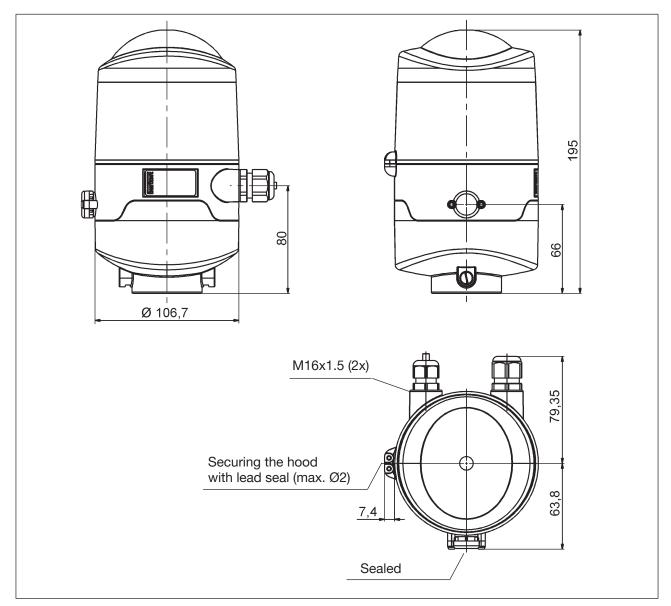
Dimensional drawing (for models without solenoid valves = feedback top)
